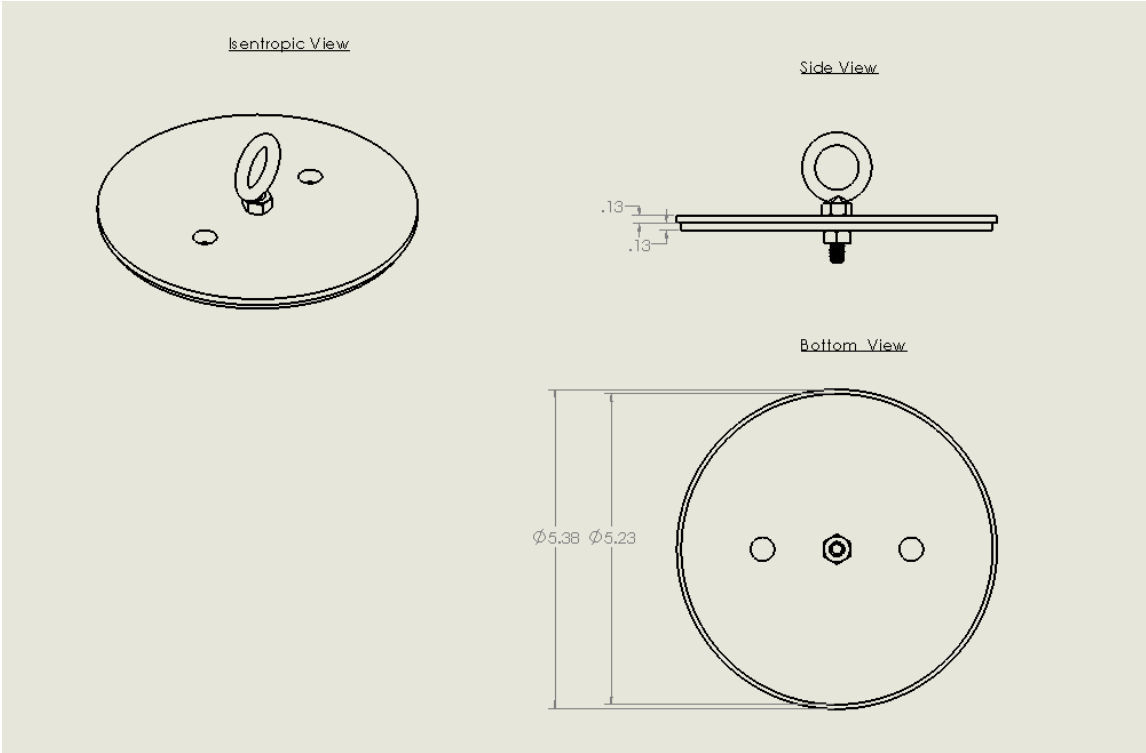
Electronics Bay Bulkhead Dimensions (inches)
